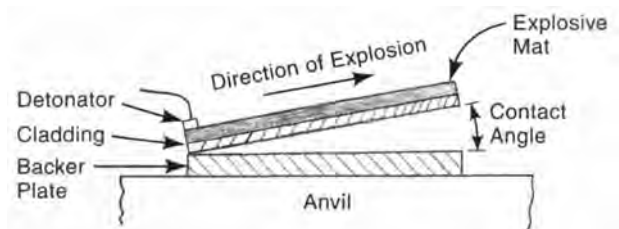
C13f Explosive welding (EXW). The extreme force of the explosion bonds the cladding to the plate.
